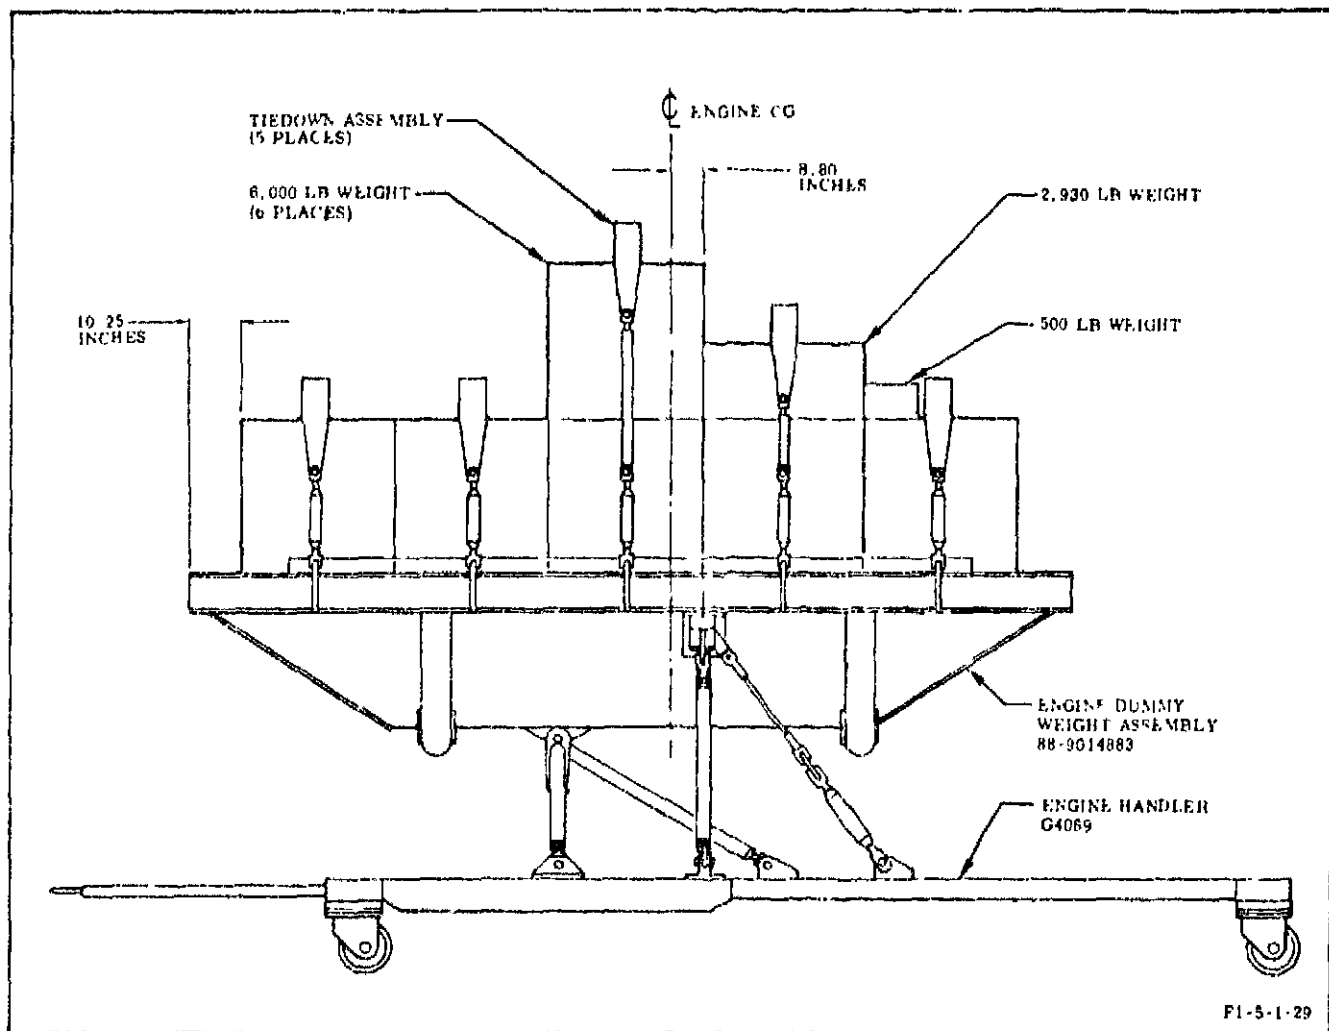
Recommended Proof-Test Setup for Engine Handler
